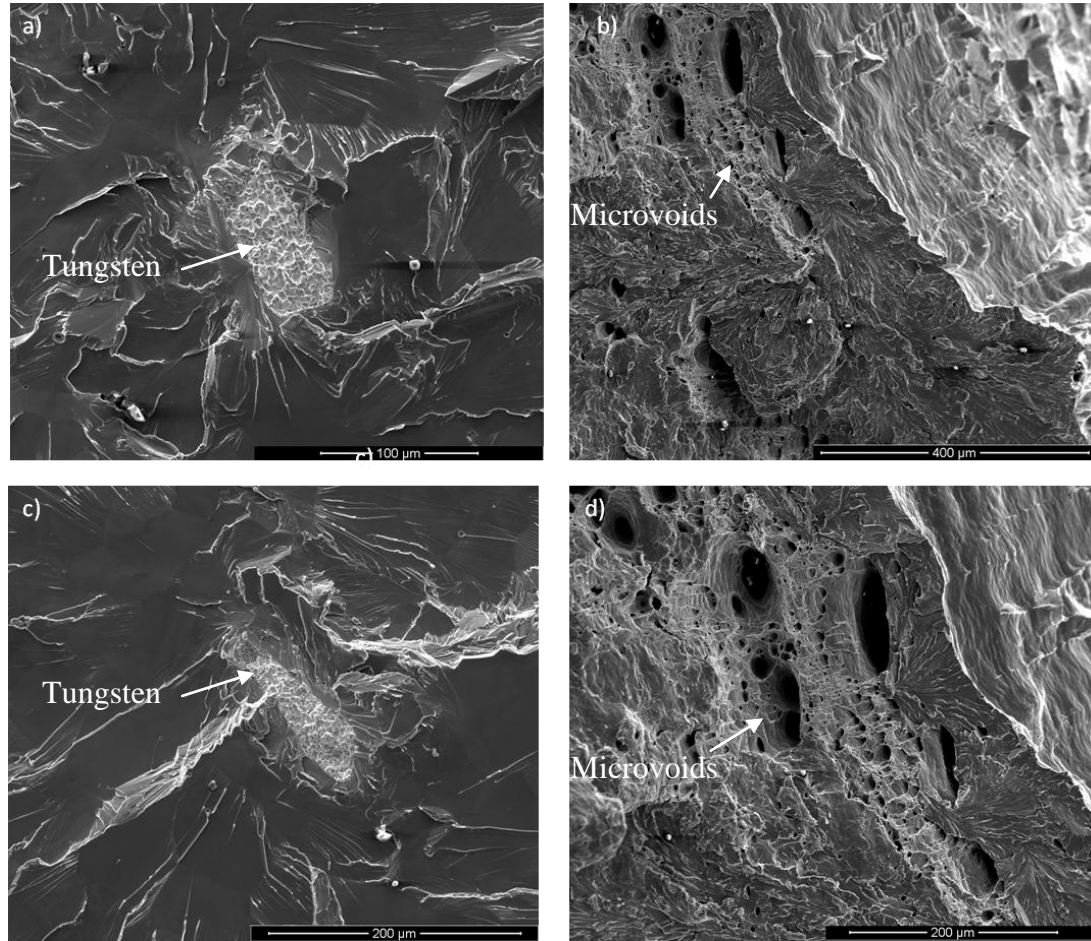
Fracture Surface of 100-Cr Elevated Temperature Tensile Specimens
